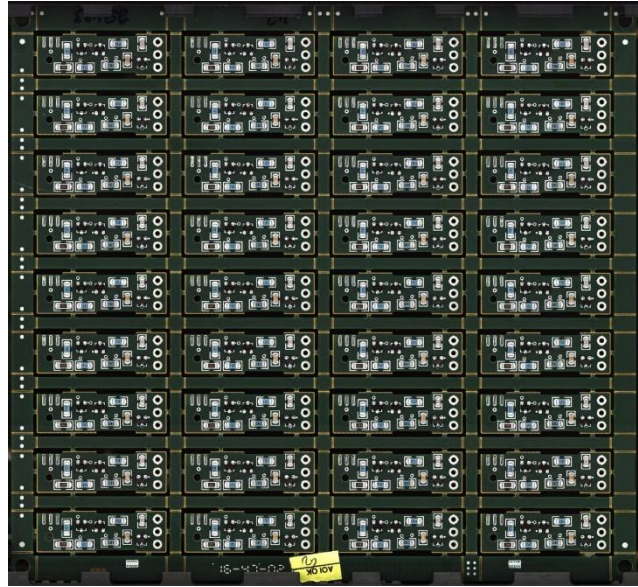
Panelized array of surface-mounted PCBs showing components, copper traces, and solder joints.
